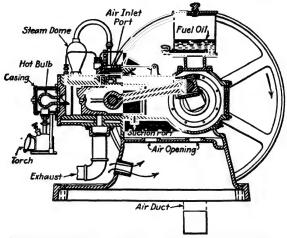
Mietz and Weiss hot-surface ignition engine.
